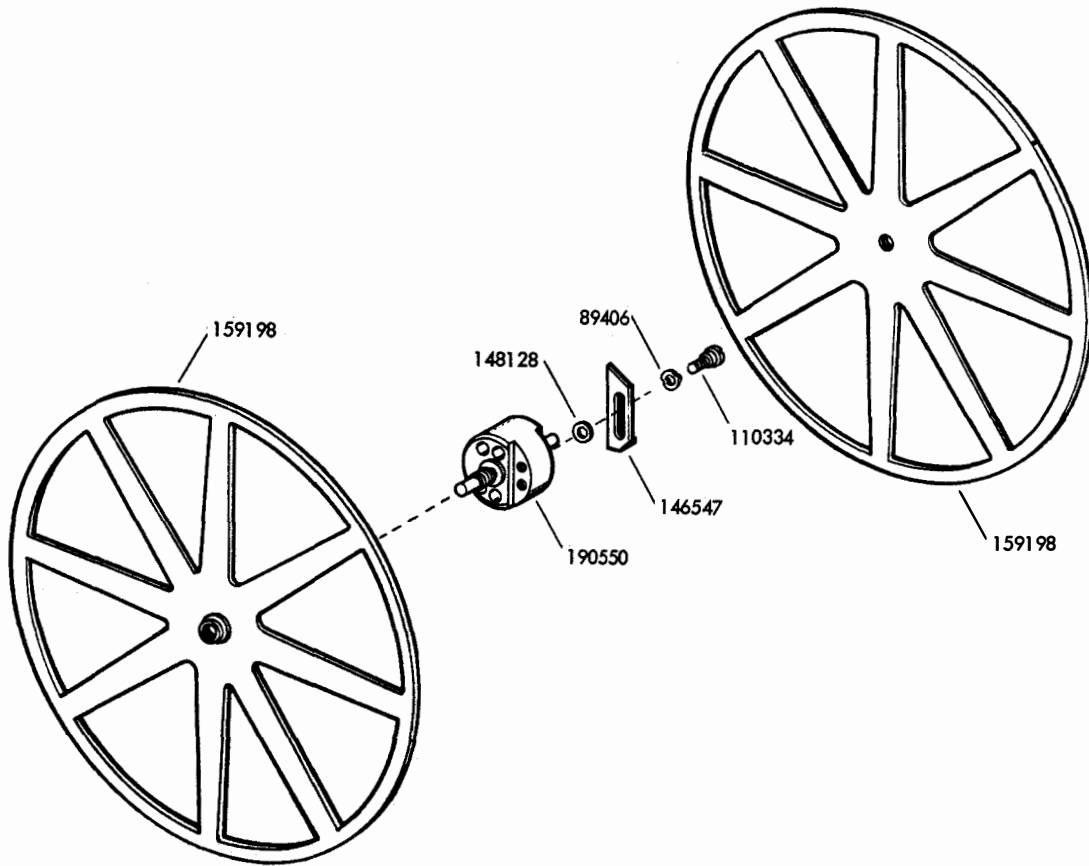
190594 TAPE SUPPLY REEL ASSEMBLY
